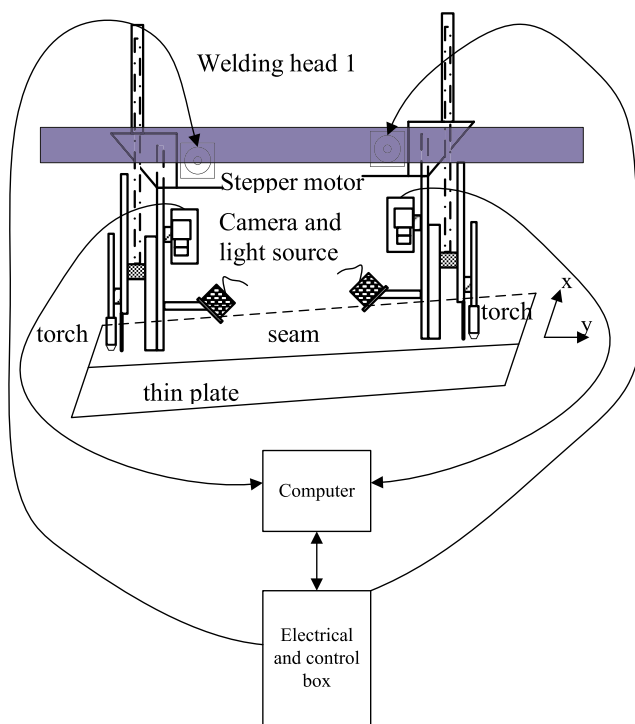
A double head welding robotic system structure with visual servo control unit
